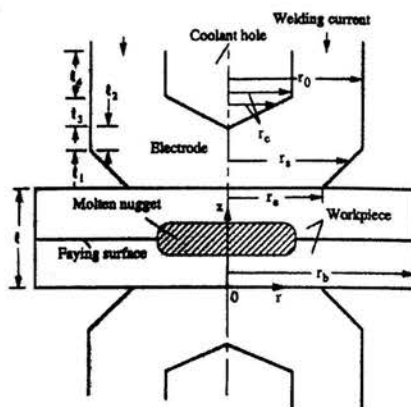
Sketch for resistance spot welding and coordinate system.
